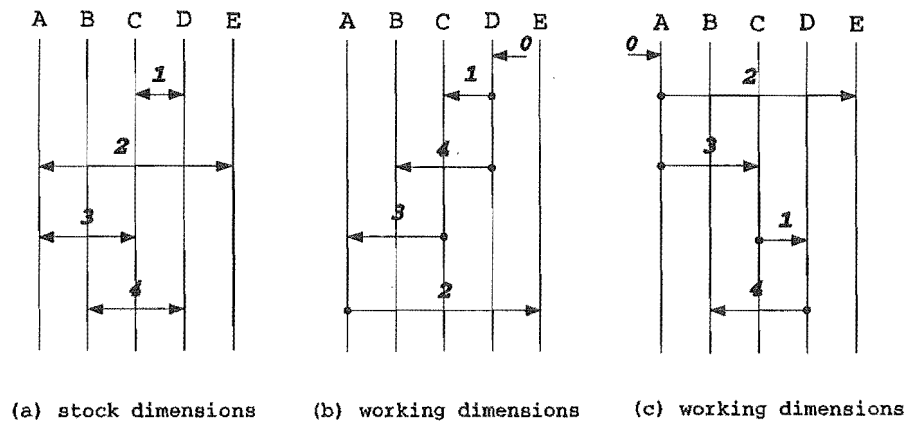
The method for converting the stock dimensions to the working dimensions.
